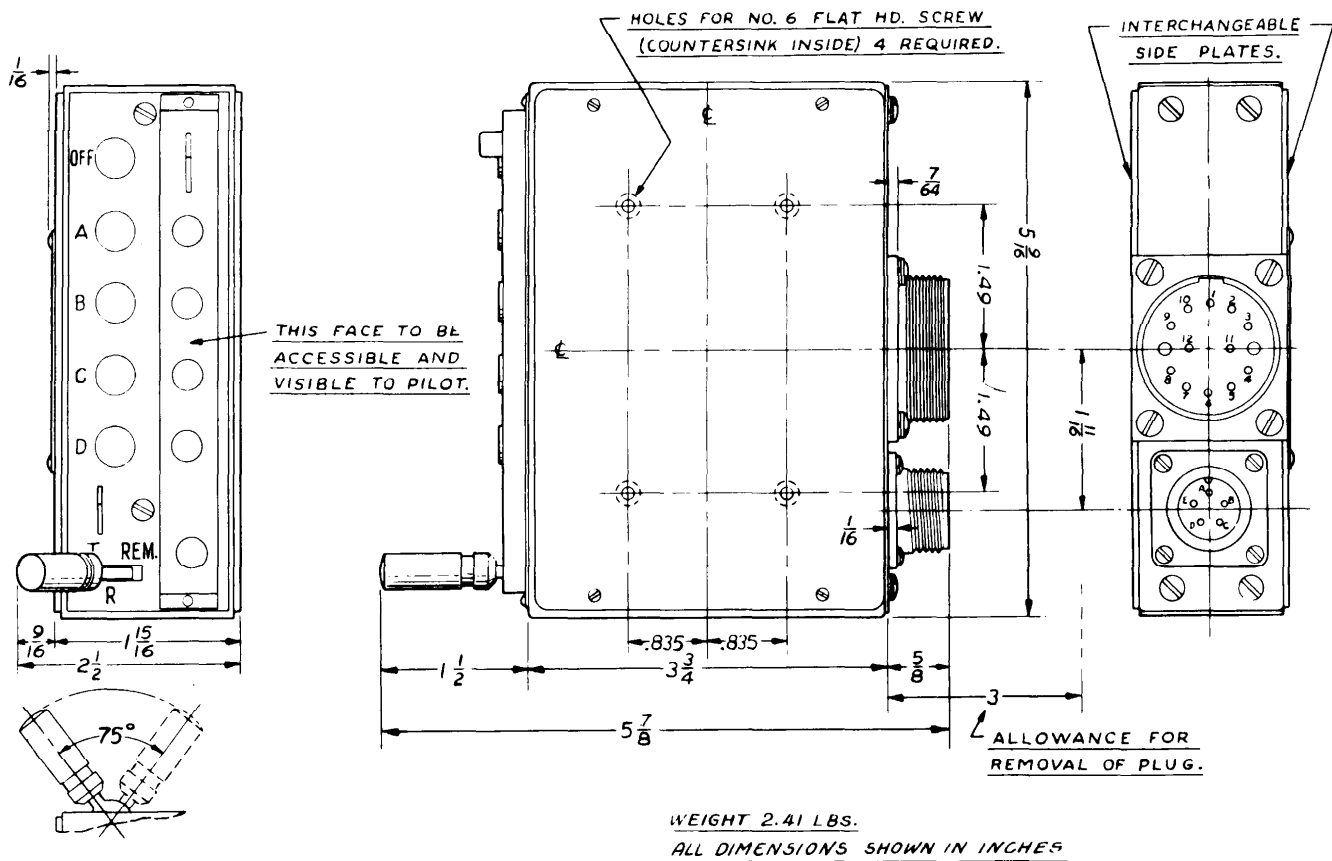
RADIO CONTROL BOX BC-602-A, OUTLINE AND MOUNTING DIMENSIONS
